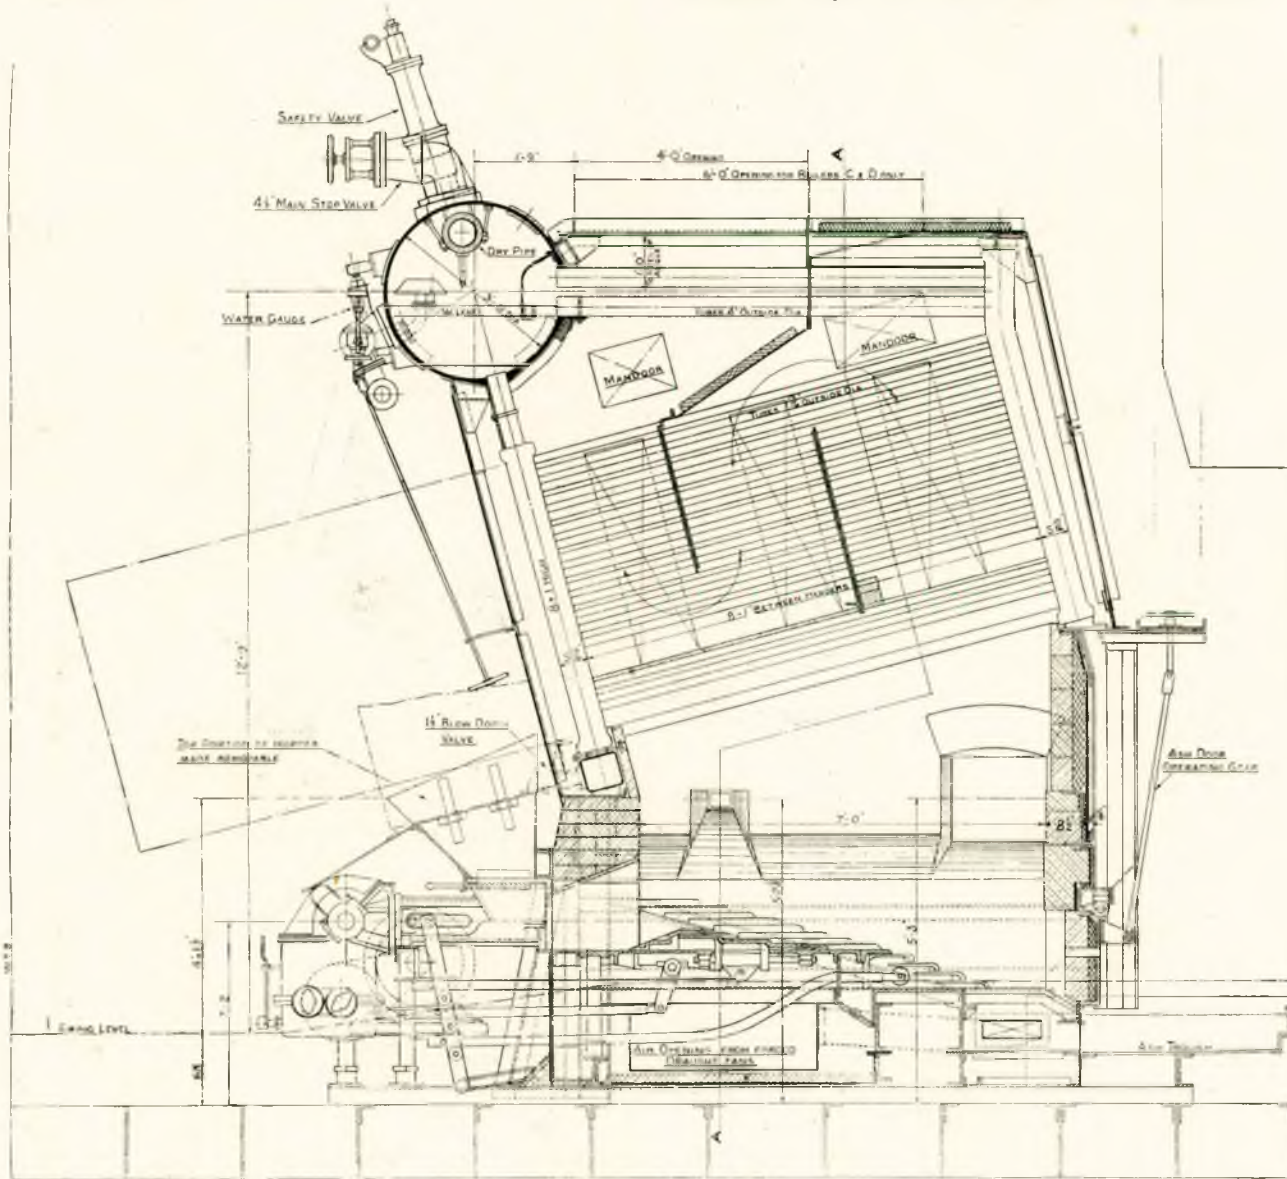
Cross sectional view of boiler with mechanical stoker in "Duke of Lancaster".
